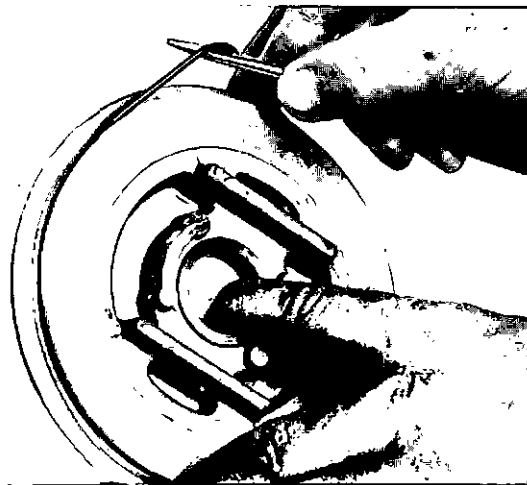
, (T465063). Remove the O-ring from the oil seal plate
